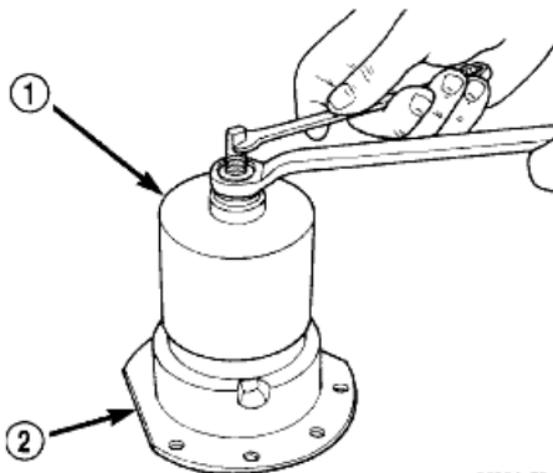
Installing Special Jaw Set L-4518 & Remover 6062A Onto Differential Bearing Race
